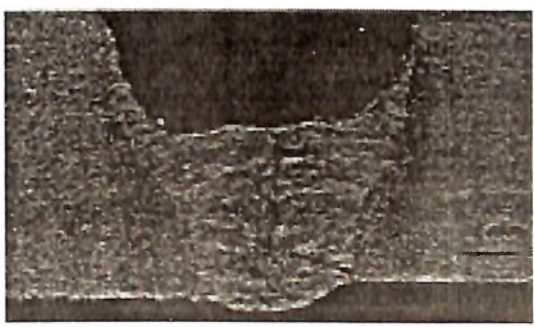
Diagonal crack path of root pass E9010 weld in WIC test.
